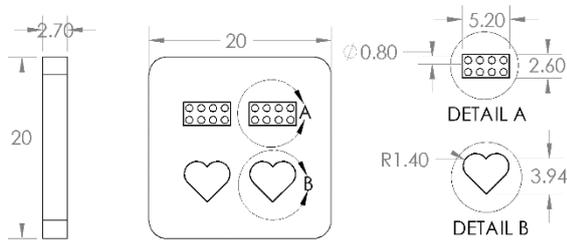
Drawing of the meso-scale insert (micro) based on [7] (dimensions in mm)
